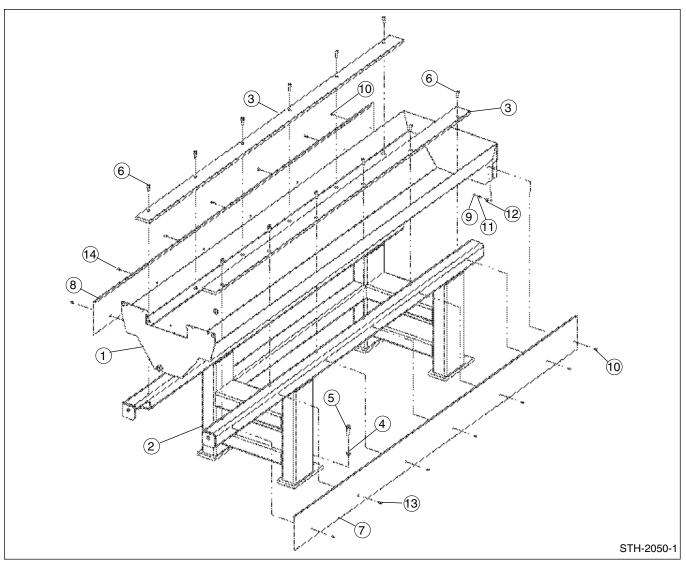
FIGURE I - WORK AREA BASE FINAL ASSEMBLY (1 of 3)
